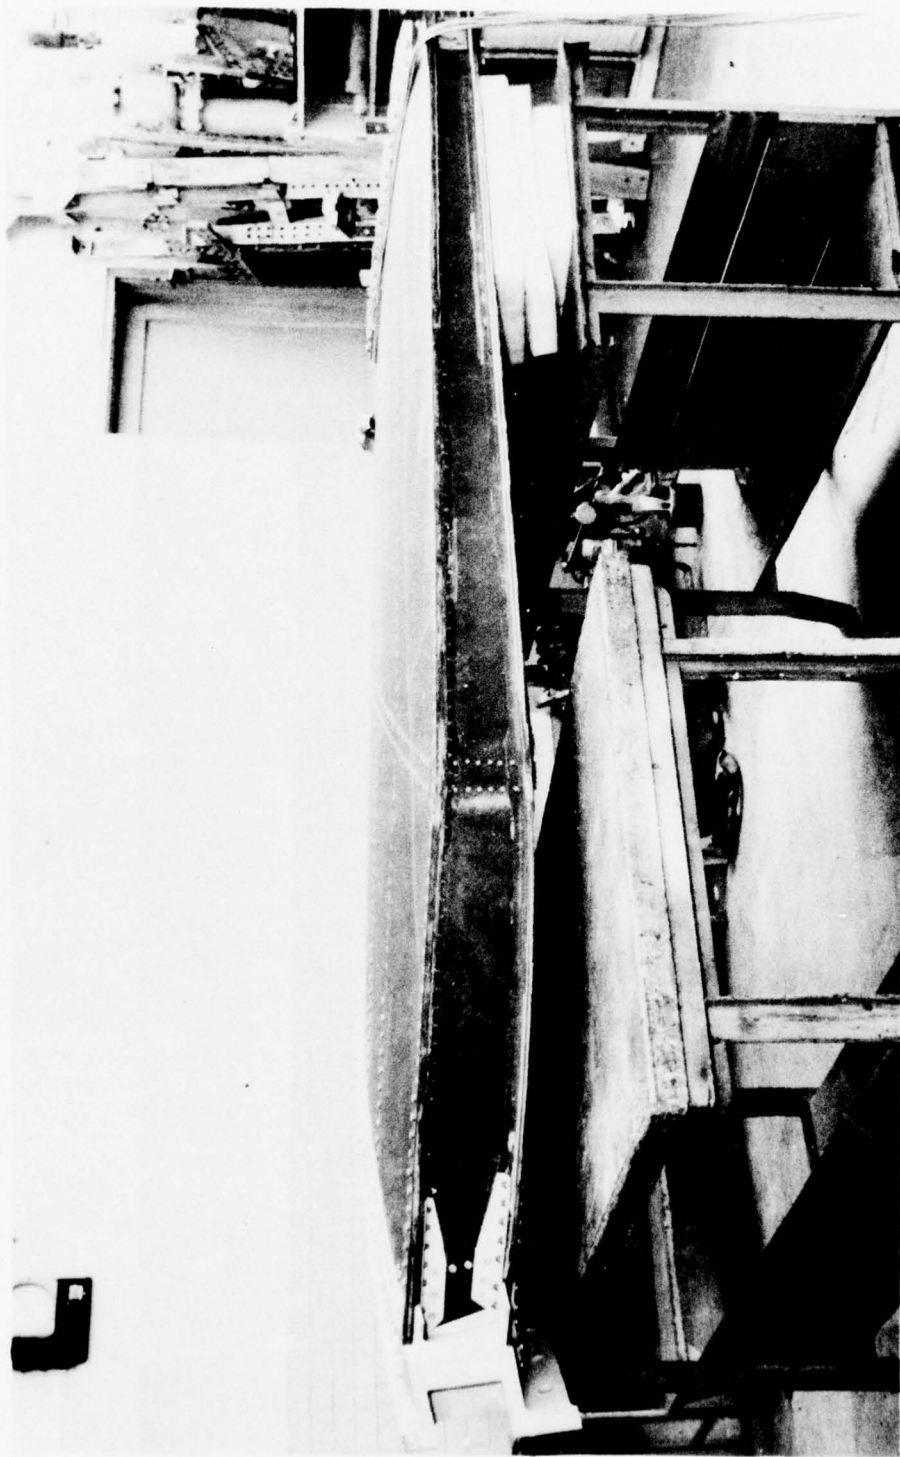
COMPOSITE WING BOX ASSEMBLY - FRONT VIEW
